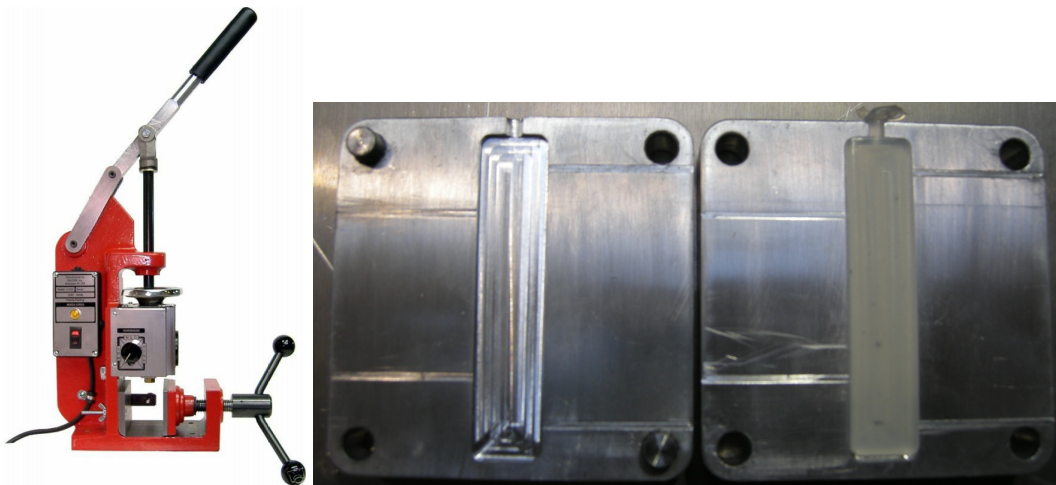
Photo of hand-operated injection moulding machine and the mould for a bar sample
